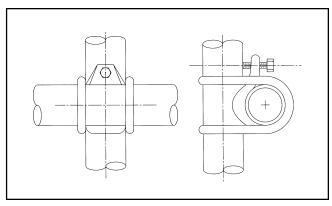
Scaffolding clamp used to fabricate main testing machine frame.
